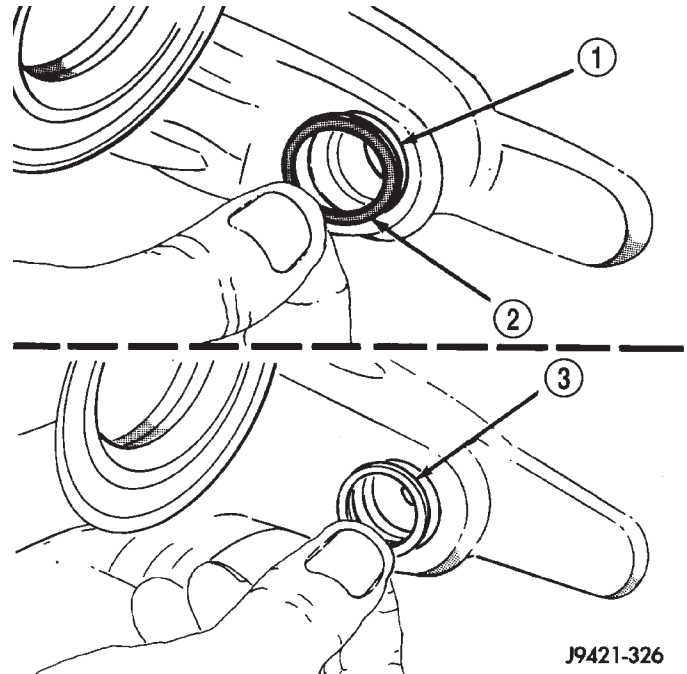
Sector Shaft O-Ring And Retainer Installation
